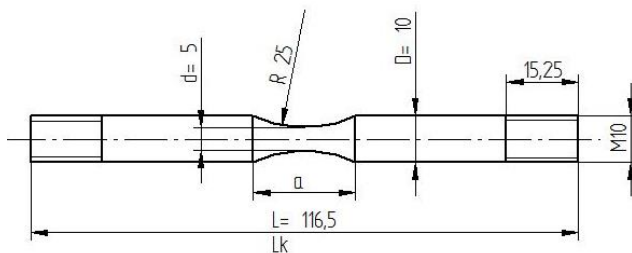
The shape and dimensions of the sample used for testing (threaded parts refer to samples made of C45 steel)
